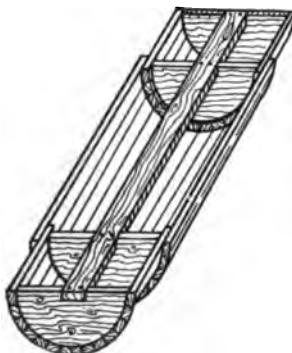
Slightly Heavier Construction for Cylinder Pattern
